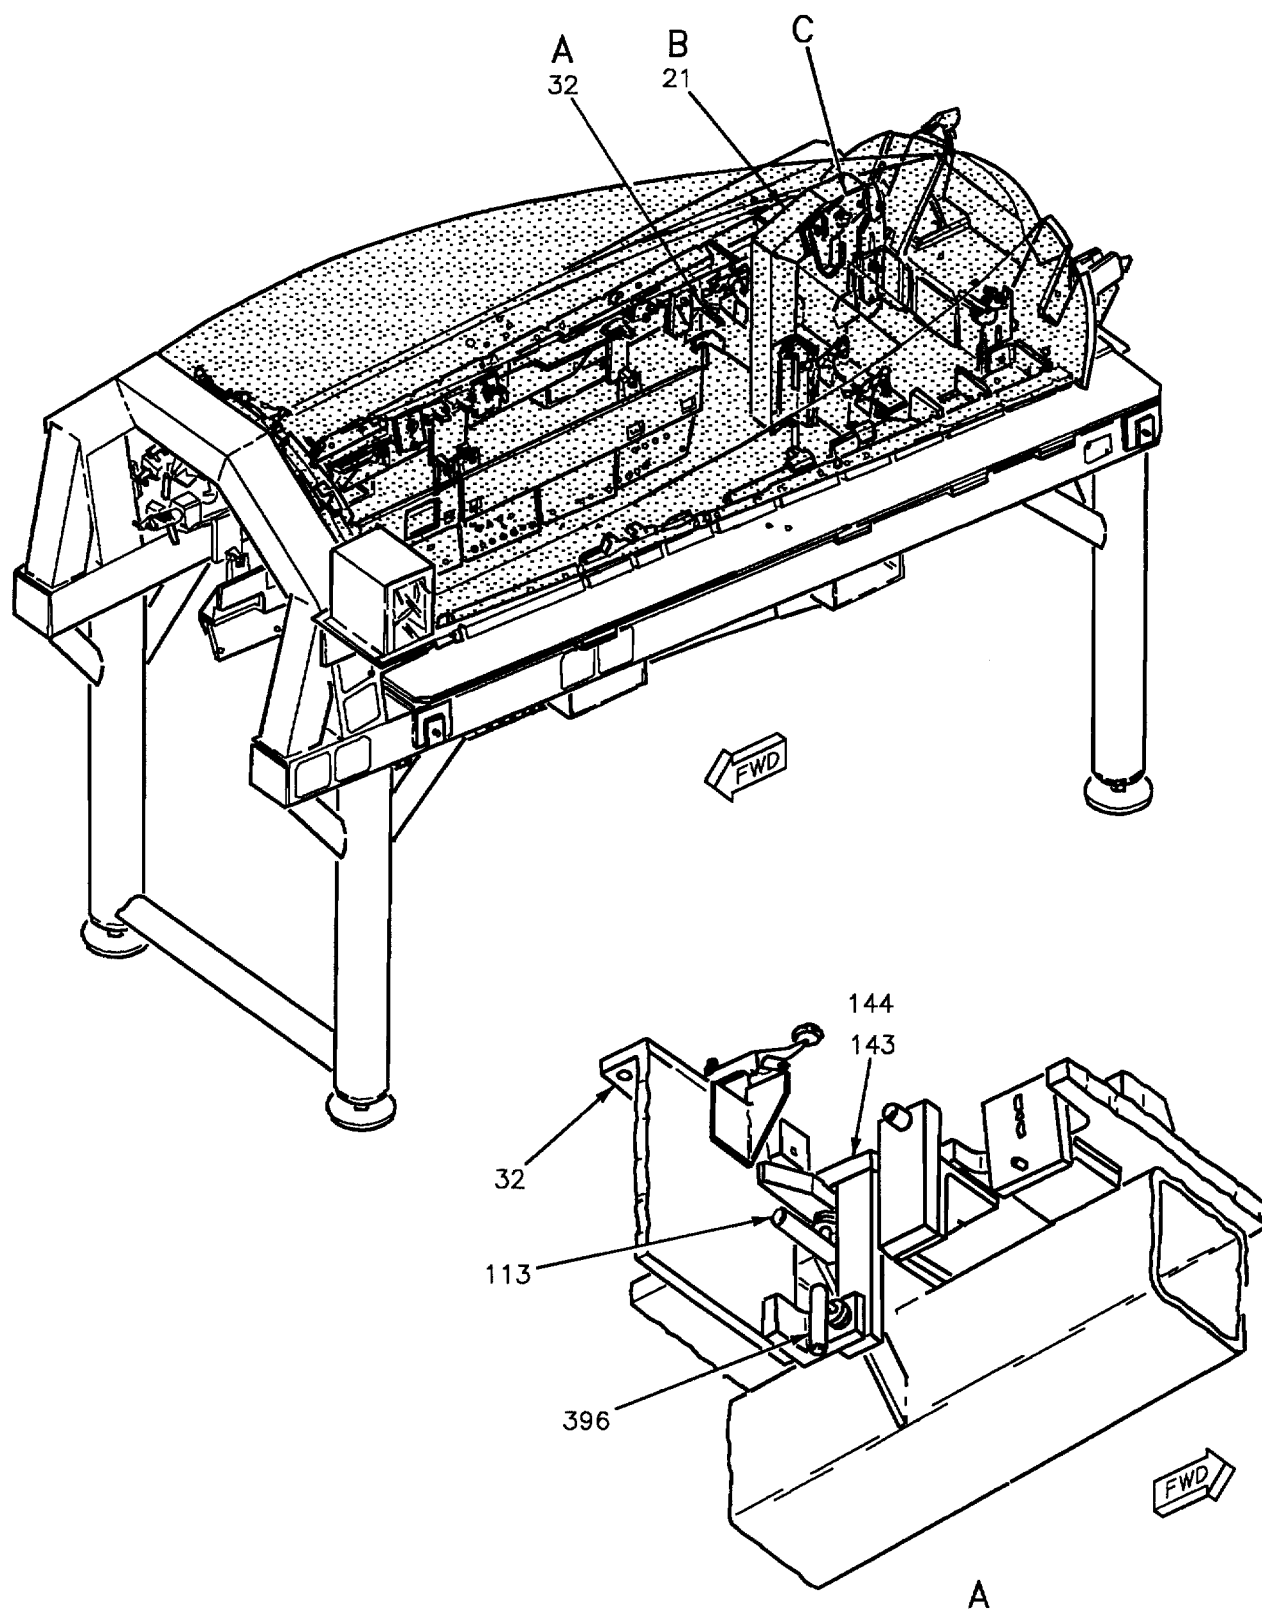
Inspection or Replacement - Thruster Support (Sheet 1)
